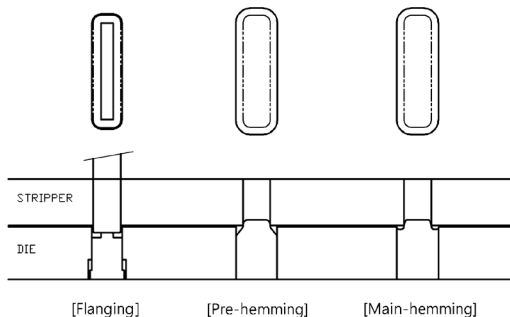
Punch shape and die stripper at 3 steps hemming with shape
